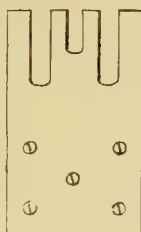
PLATE FOR SELF-INKING ROLLERS.
